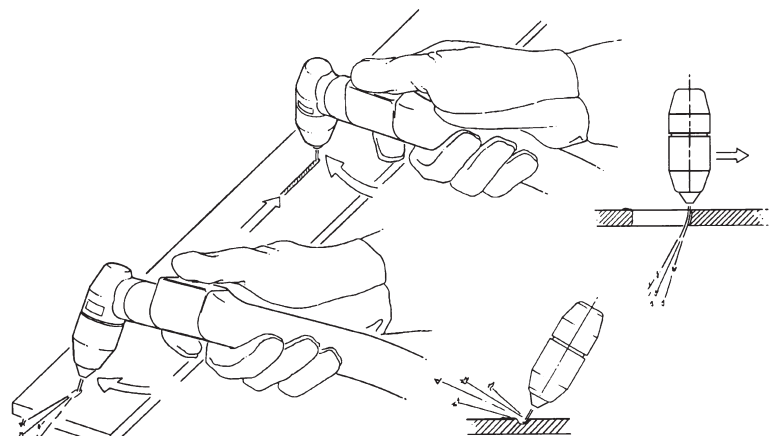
Piercing & Cutting Techniques using the PT-32EH
